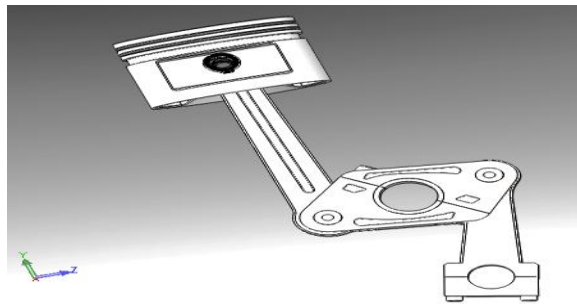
CAD Design multilink Variable-Compression Engine Packs Punch
